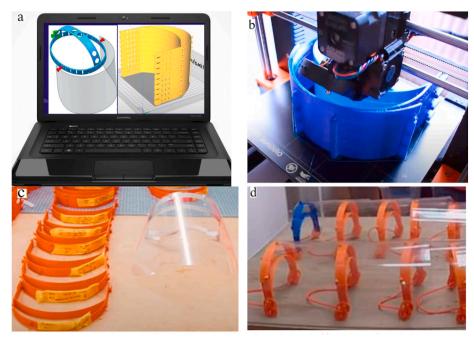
3D printing of respiratory face shield using double-sided tape, showing the (a) computer-aided design (CAD) of Face shield holder and shield, (b) 3D printing process, (c) finished product of the shield holder and (d) complete face shield holder with films.
